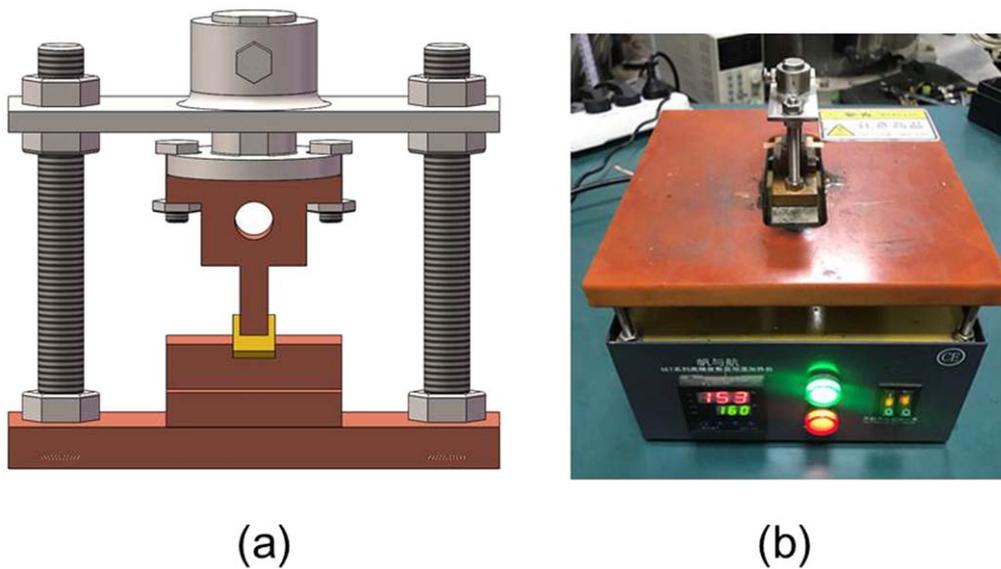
(a) The welding support fixture to keep sample perpendicular to upper anvil. (b) The whole soldering assembly placed on the heating platform.
